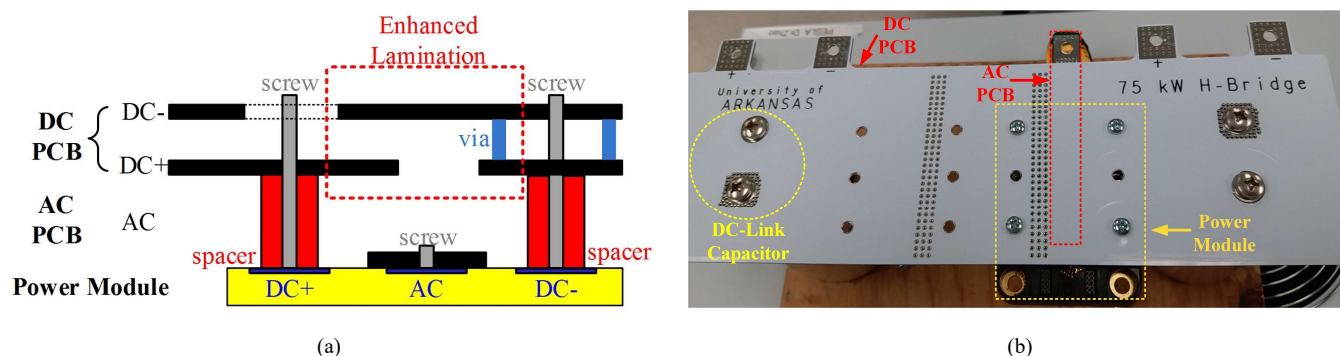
A low inductance PCB bussing design for the module with midpoint located between DC+ and DC- terminals (a) a diagram to illustrate the bussing design and (b) the picture of the prototype.
